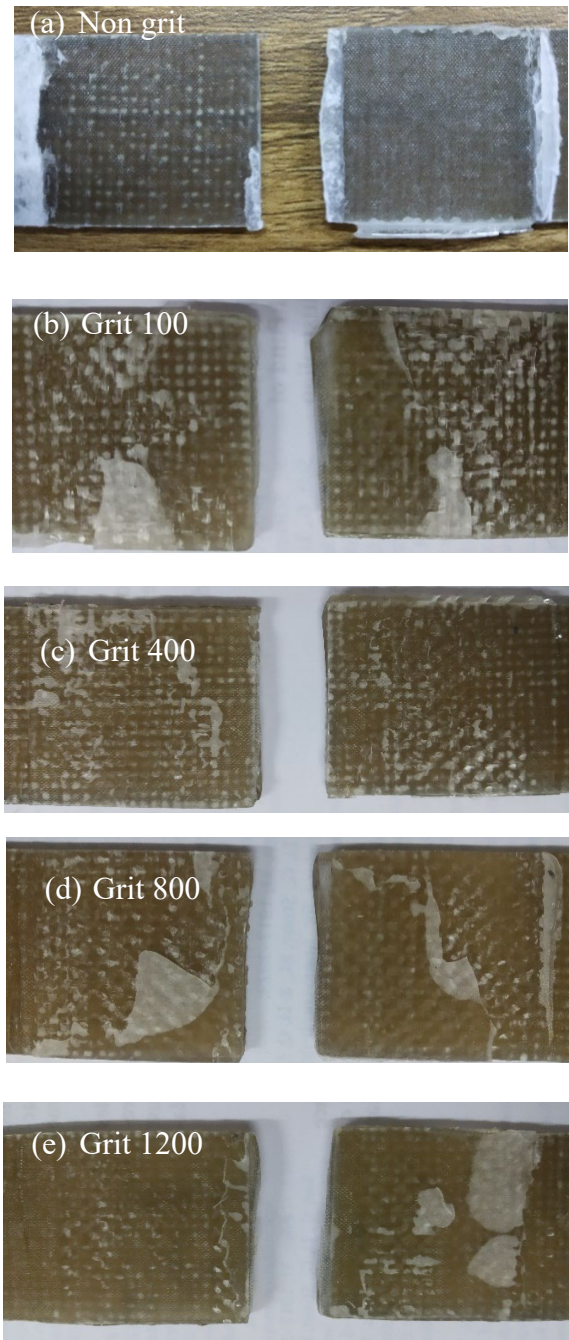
Fracture surface of the bonded area after SLJ test.
